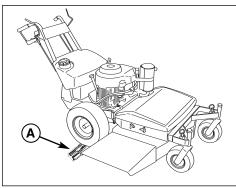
Raise Rear of Machine A. 2 x 4 Block
